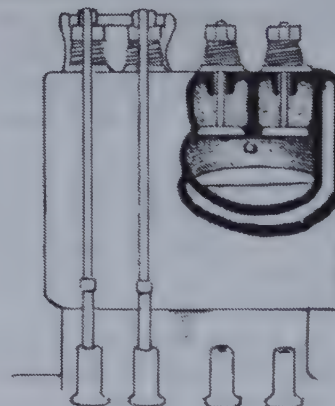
A—Overhead Rocker Arm, "mechanical" inlet and exhaust valve.
